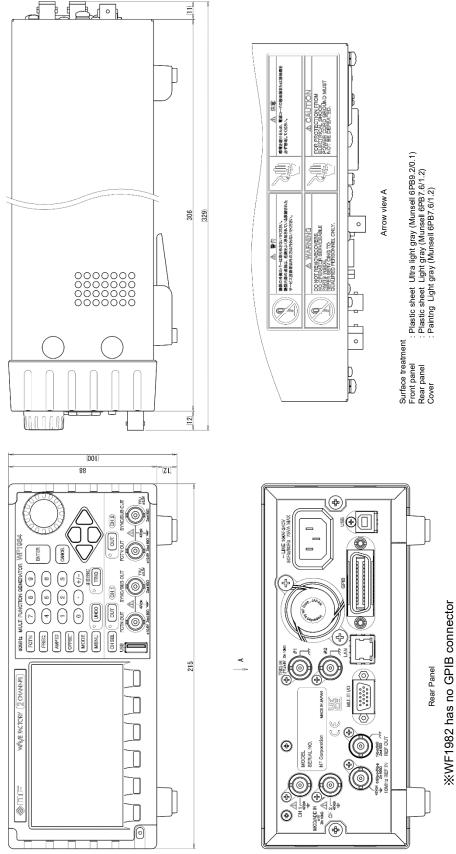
Outline dimensional drawing (WF1984/WF1982)
